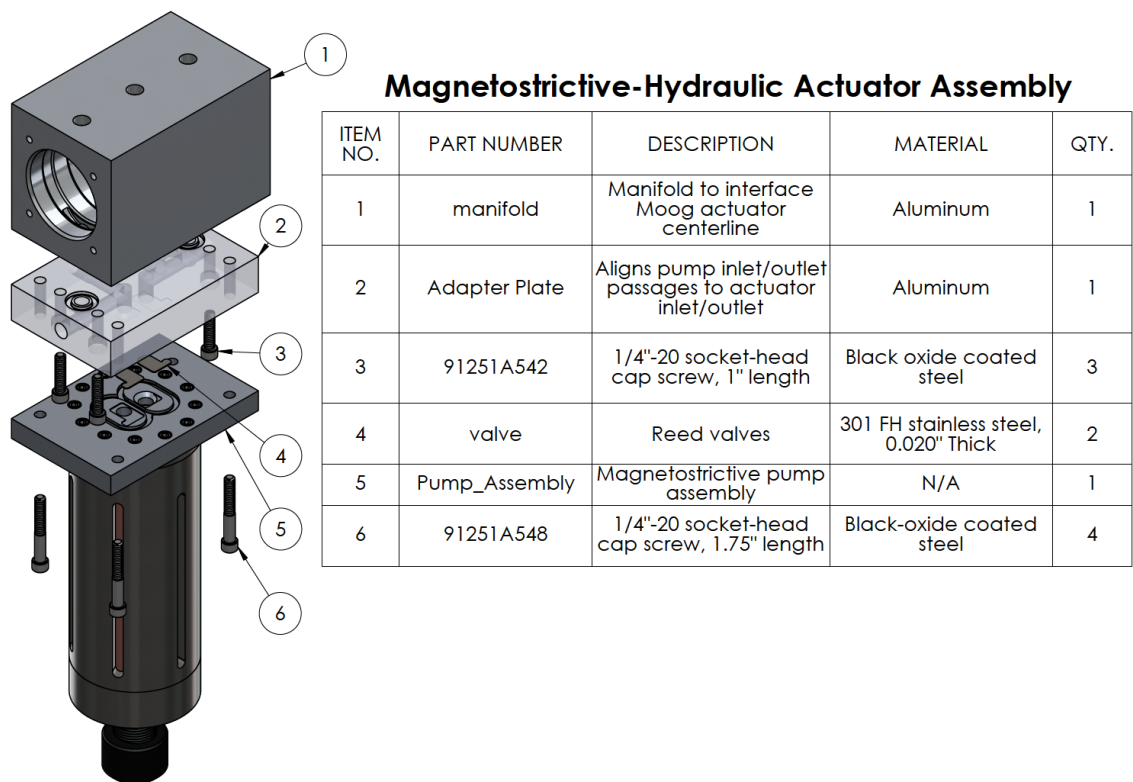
Exploded view of the EHA actuator assembly, showing the placement of the rectification reed valves.
